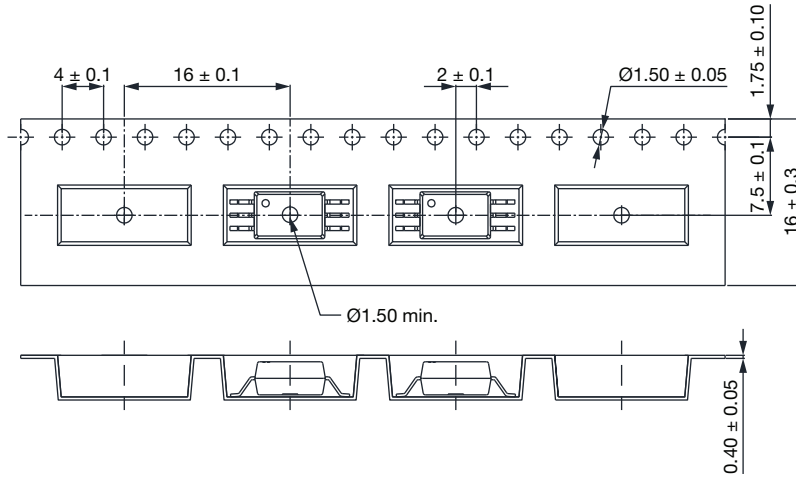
Tape and Reel Packaging (1000 pieces on reel)
